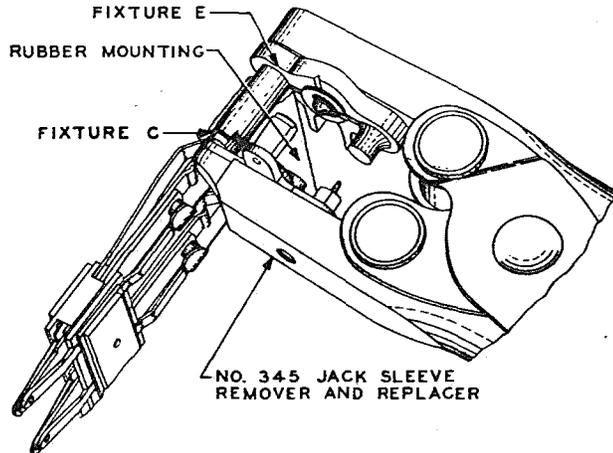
Method of Forcing Sleeve Forward, Flush with Face of Rubber Mounting
